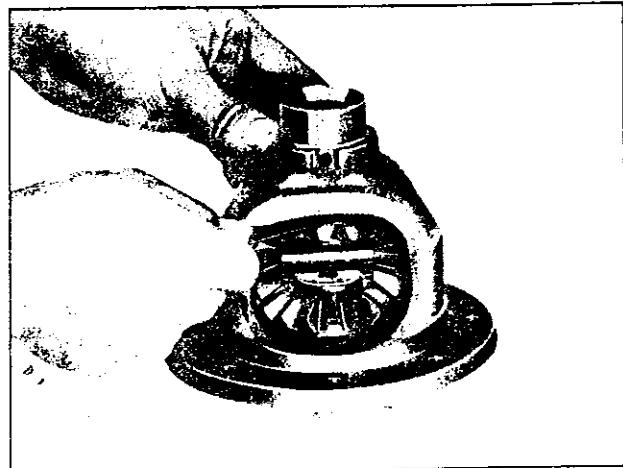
Measuring the clearance between the side gear and thrust washer
